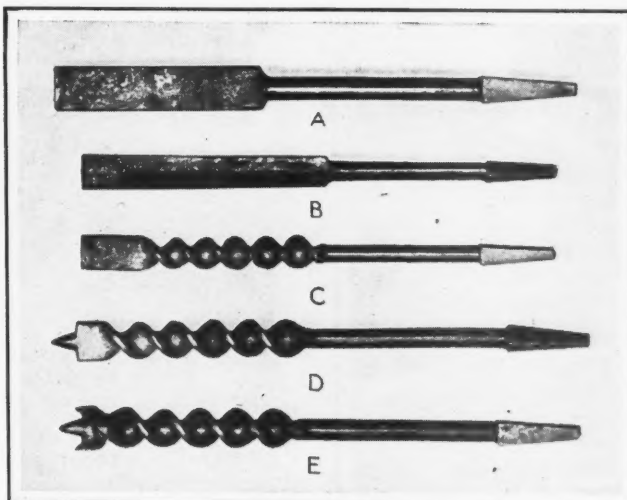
Appearance of an Auger Bit after Each Successive Forging Step
